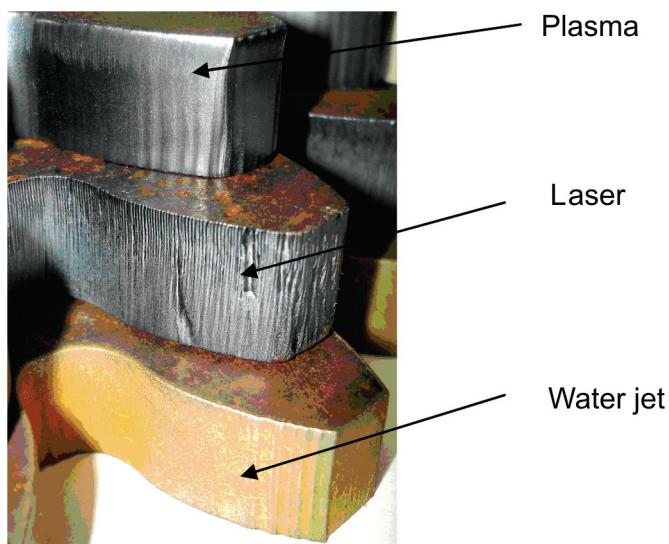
The teeth of the gear wheel made by unconventional technologies
